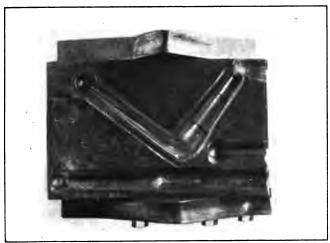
Drop Forging Die and Bending Die for Steering Gear Part
